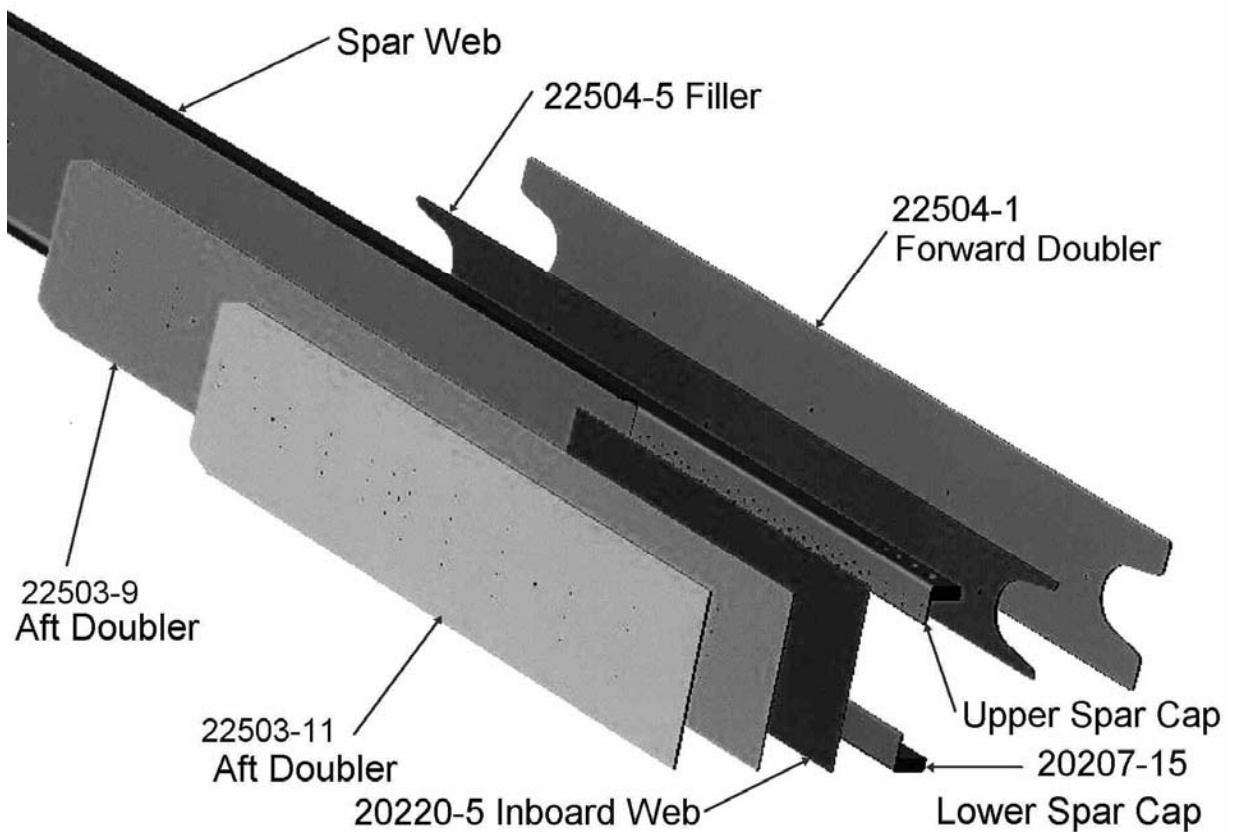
Exploded View of New Spar Inboard Web and Doublers
